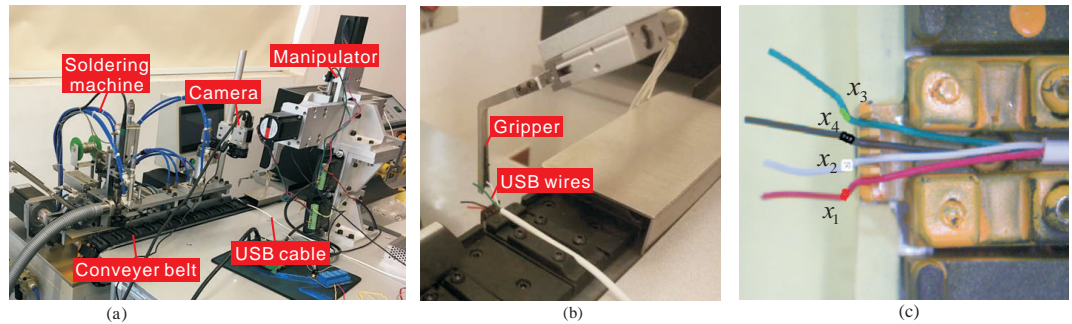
An experimental setup of vision-based robotic manipulation system (a) The setup consists of an automatic soldering machine, a robot manipulator, a camera, a robotic gripper, a control module, and a computer; (b) The robotic gripper is controlled to manipulate the USB wires; (c) The camera is installed to detect the positions of wires.
